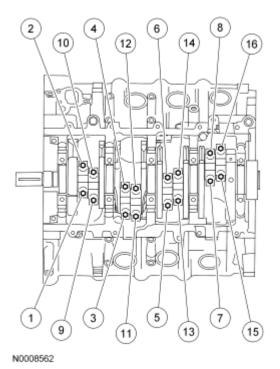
Identifying Tighten Sequence Of Connecting Rod Bearing Caps Courtesy of FORD MOTOR CO.
